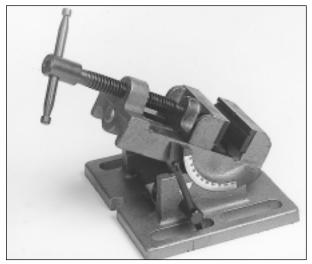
The angle vise tilts the workpiece and provides a means of drilling a hole at an angle. (Courtesy: Palmgren Steel Products, Inc.)
